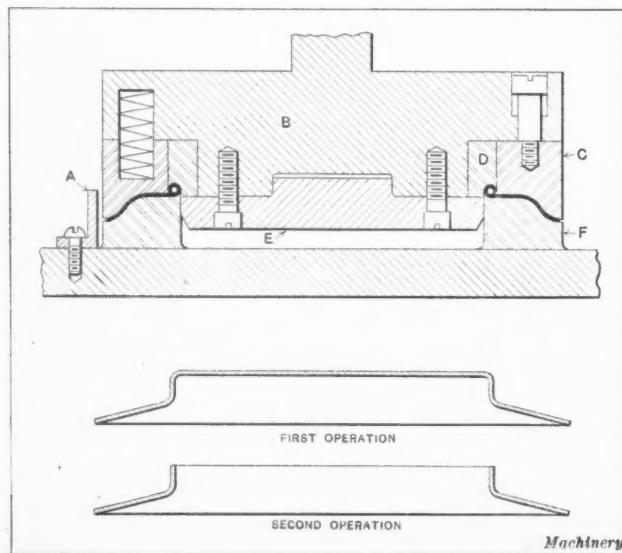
Combination Forming and Wiring Die for Bucket Cover Flanges
